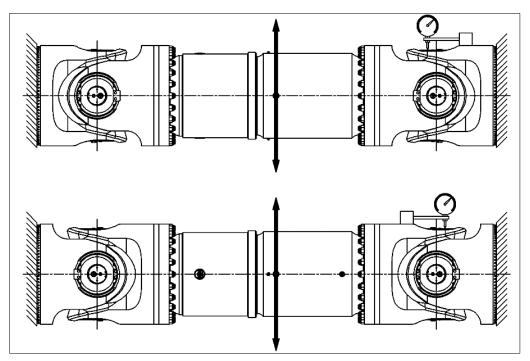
Checking axial clearance of the journal cross set on two levels
